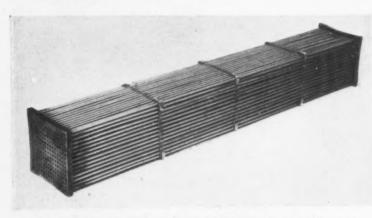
Tubular Heat Exchanger of Stainless-steel. The Tubes are "Cone-arc" Welded to the Header Plates
